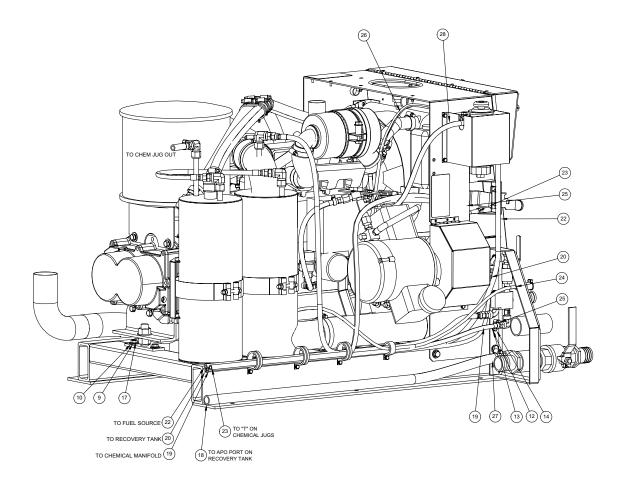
Machine Assembly CTS 450 Diesel - Side View D-5865 Rev C
